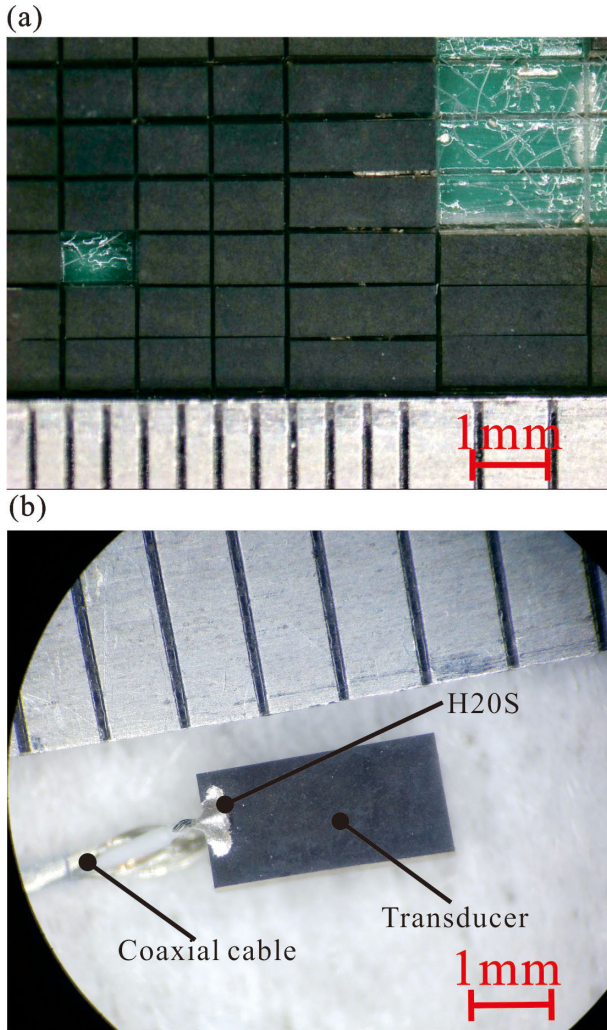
Samples, (a) after dicing, (b) after cable bonding.
